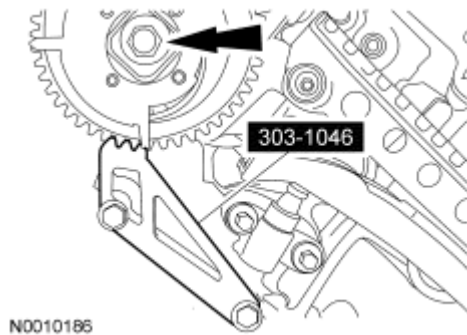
Identifying VCT Phaser Sprocket Bolt And Holder Tool
